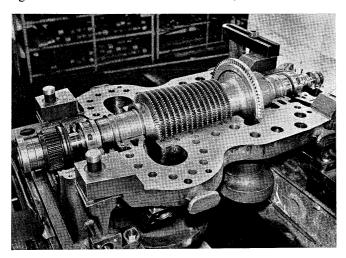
Typical G type backpressure turbine under assembly (for a pulp & paper plant) 6000 kw backpressure turbine 22 kg/cm²g 375°C backpressure 3.5 kg/cm²g 5000 rpm
